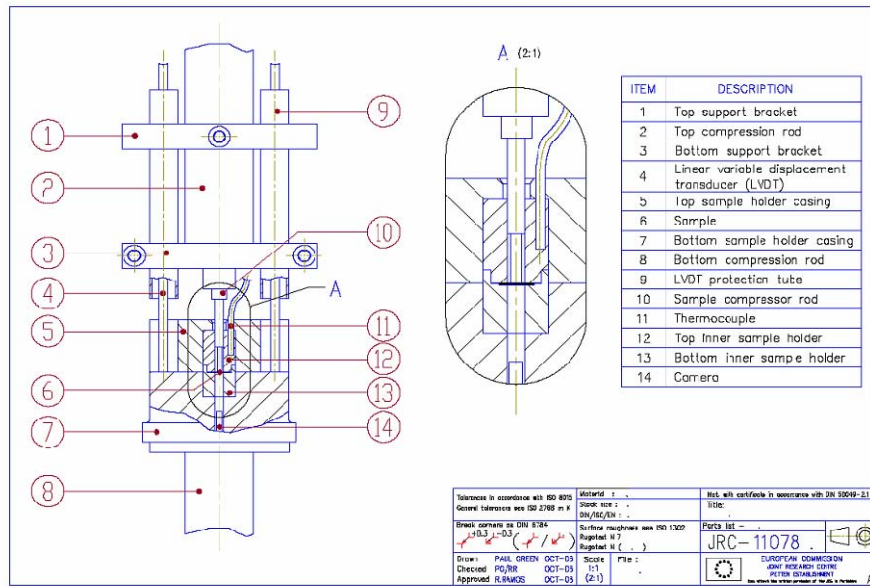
Schematic drawing of the SP low temperature fracture test equipment
